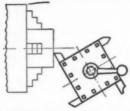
¾" square bit mounted in Model 4½-Sturret used to face work. Same tool is indexed to position and used for turning as shown below.
